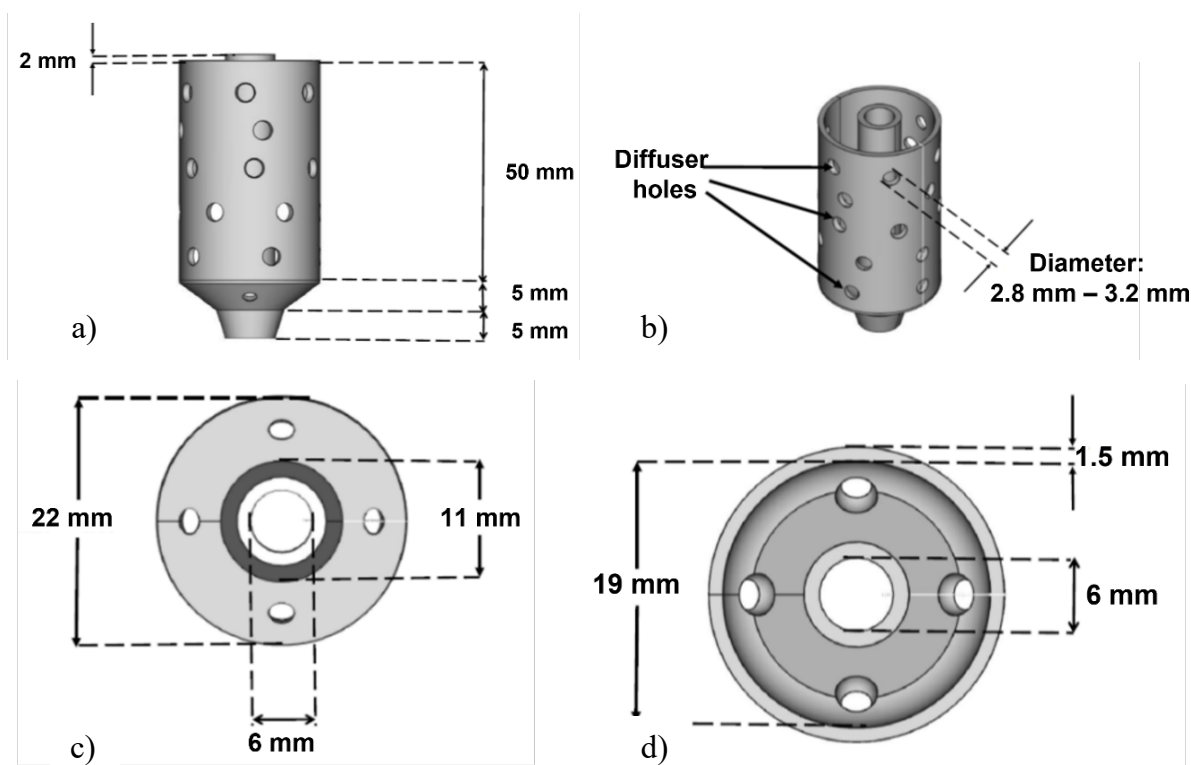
Coupon holder dimensions: a) Side view, b) Axial view, c) Bottom view, d) Top view.
